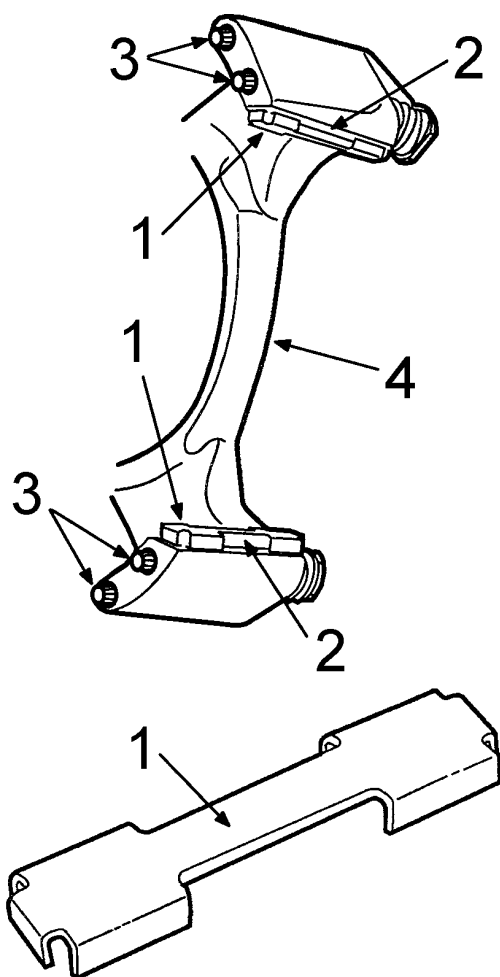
Install Abutment Slippers and 12-Point Head Bolt Plugs
